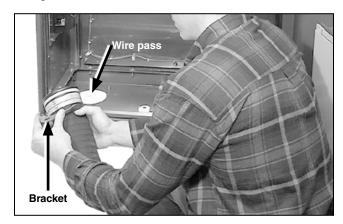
Placing the holding brackets in the grooved channel of the conduit.
